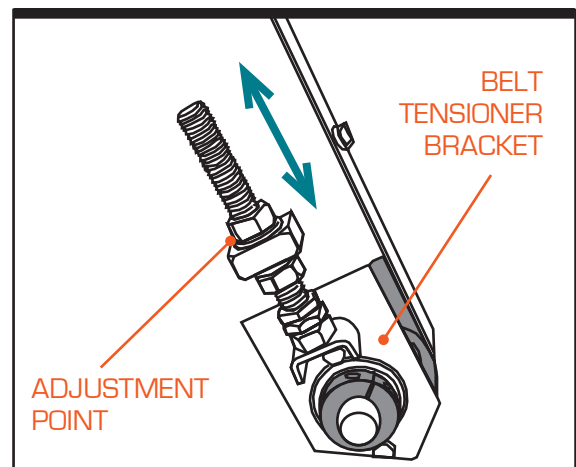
Tracking Adjustment of Belt at Tensioner
